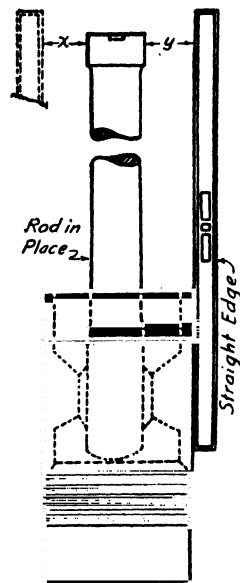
A method of checking alignment of a piston and rod with a connecting rod in place.
